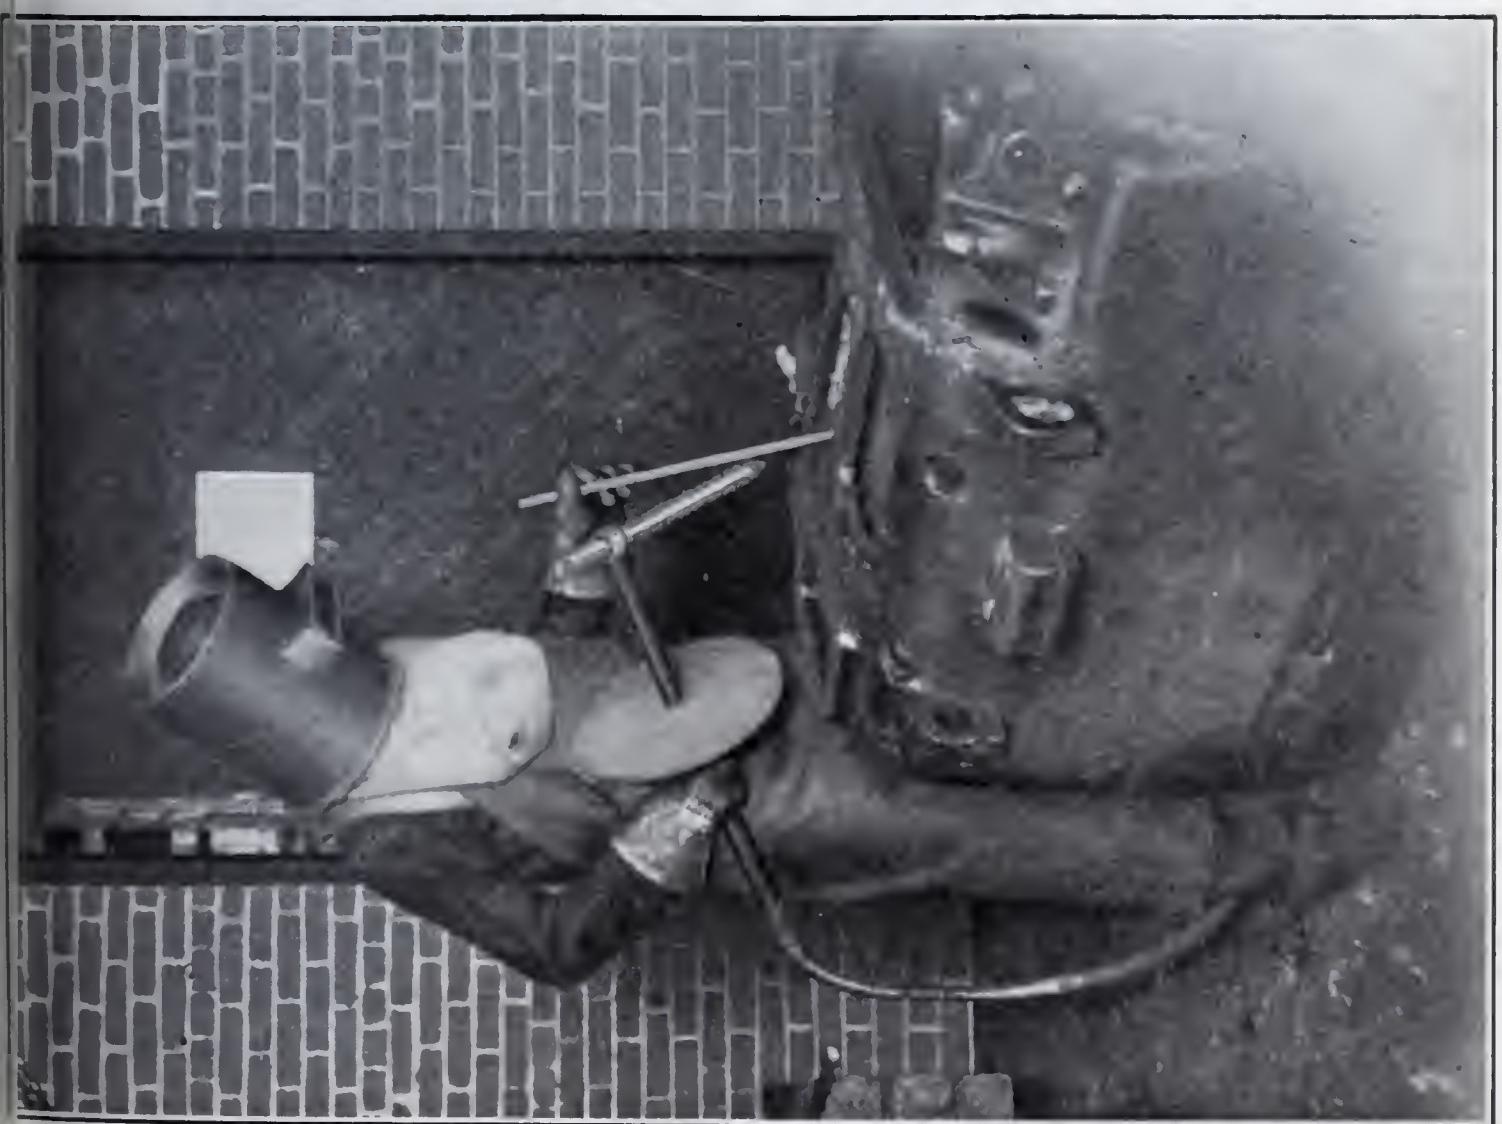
La Grange-Hoho Electric Welding Apparatus.
